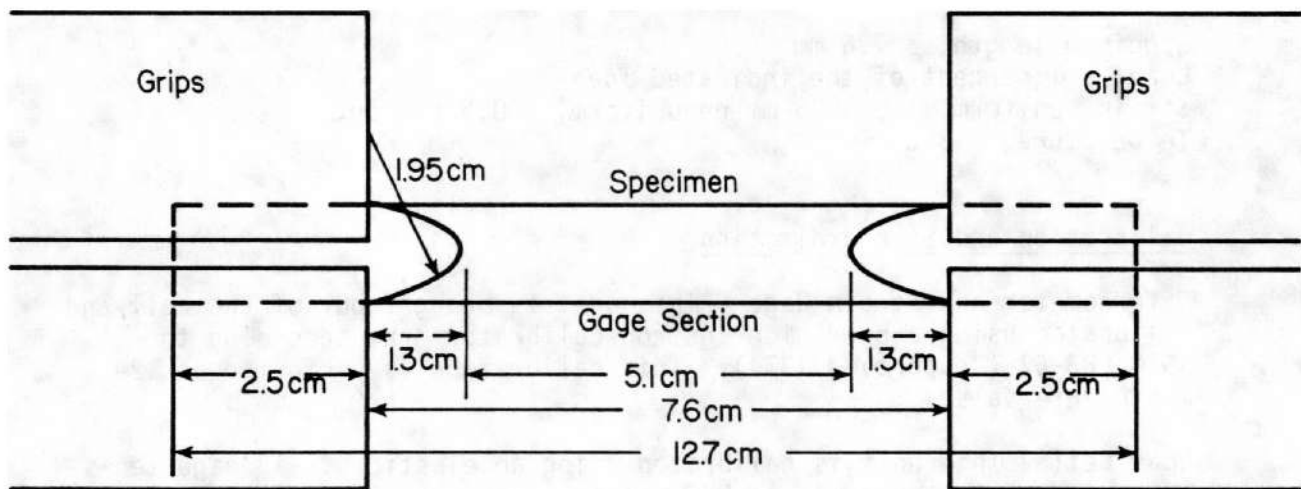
SPECIMEN ARRANGEMENT FOR TENSILE TESTS
